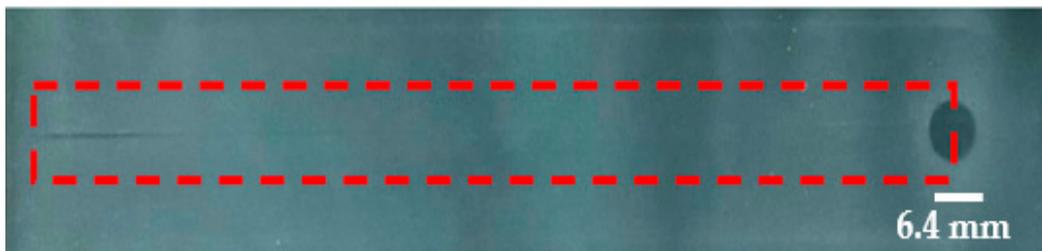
Tool 2 trial—X-ray of an AA 6061-T6 aluminum FSW weld.
